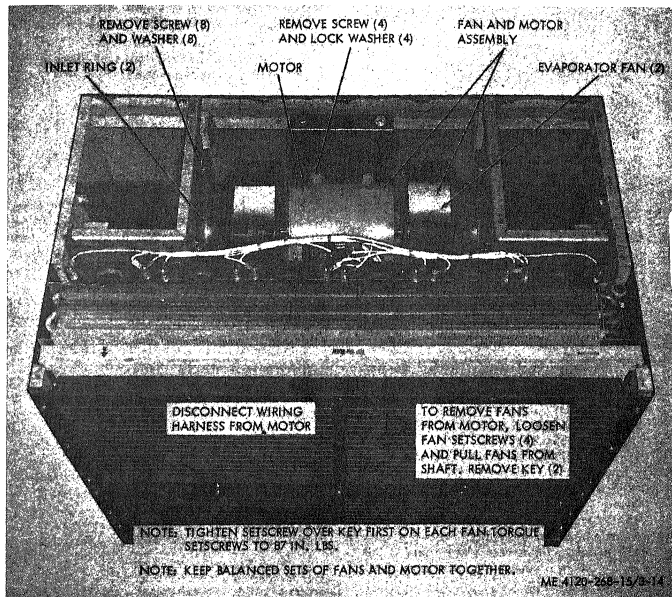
Evaporator fan and motor assembly, removal, disassembly, assembly and installation.
